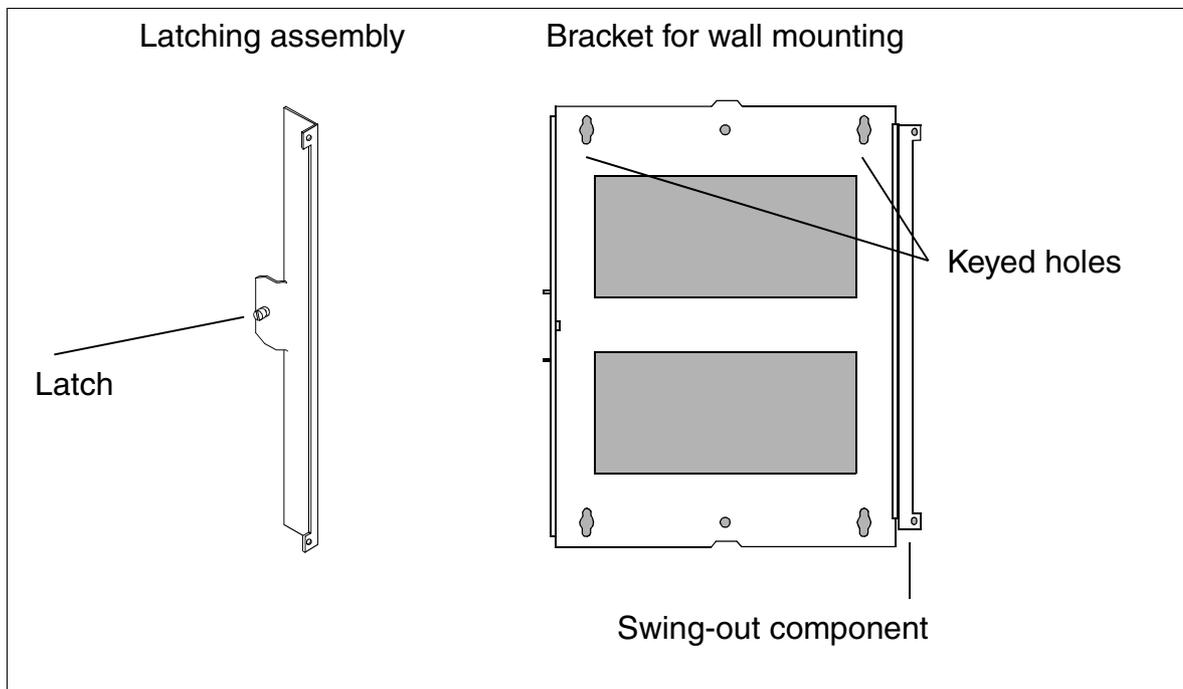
HiPath 3750 - Wall-Mount Kit (for U.S. only)
